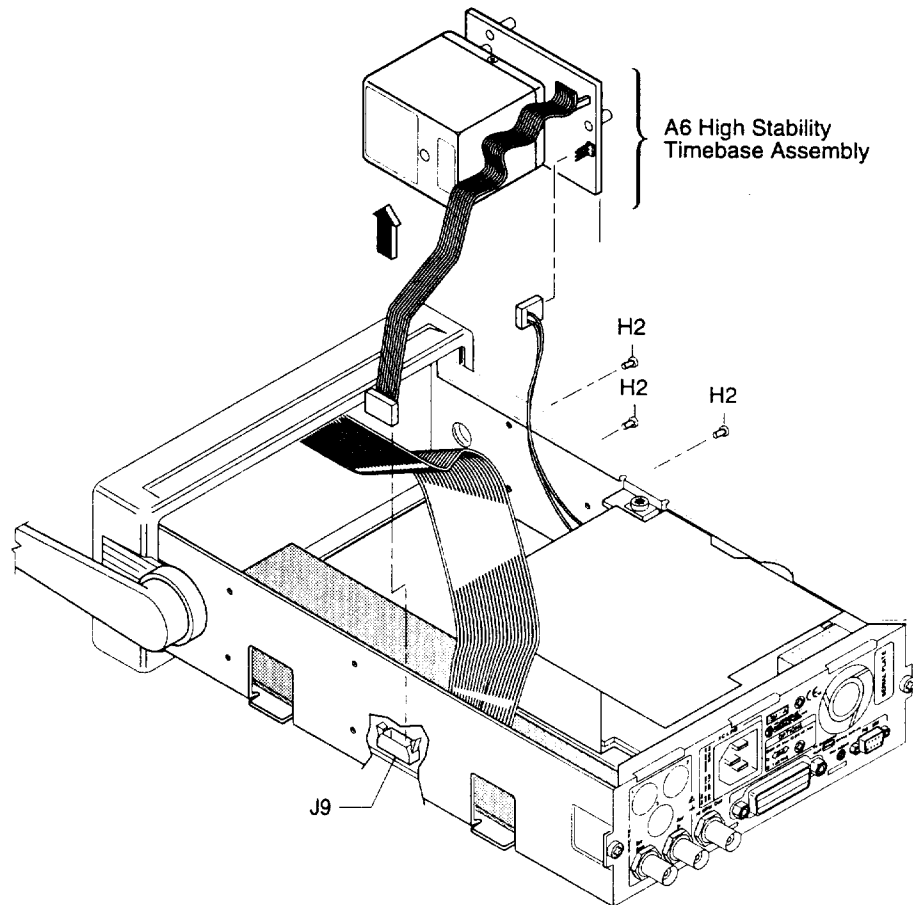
Option 001, 010, and 012 A6 High Stability Timebase Assembly Removal
